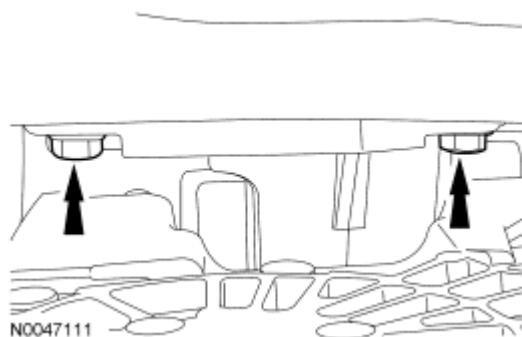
Locating LH Fender Splash Shield Screws
